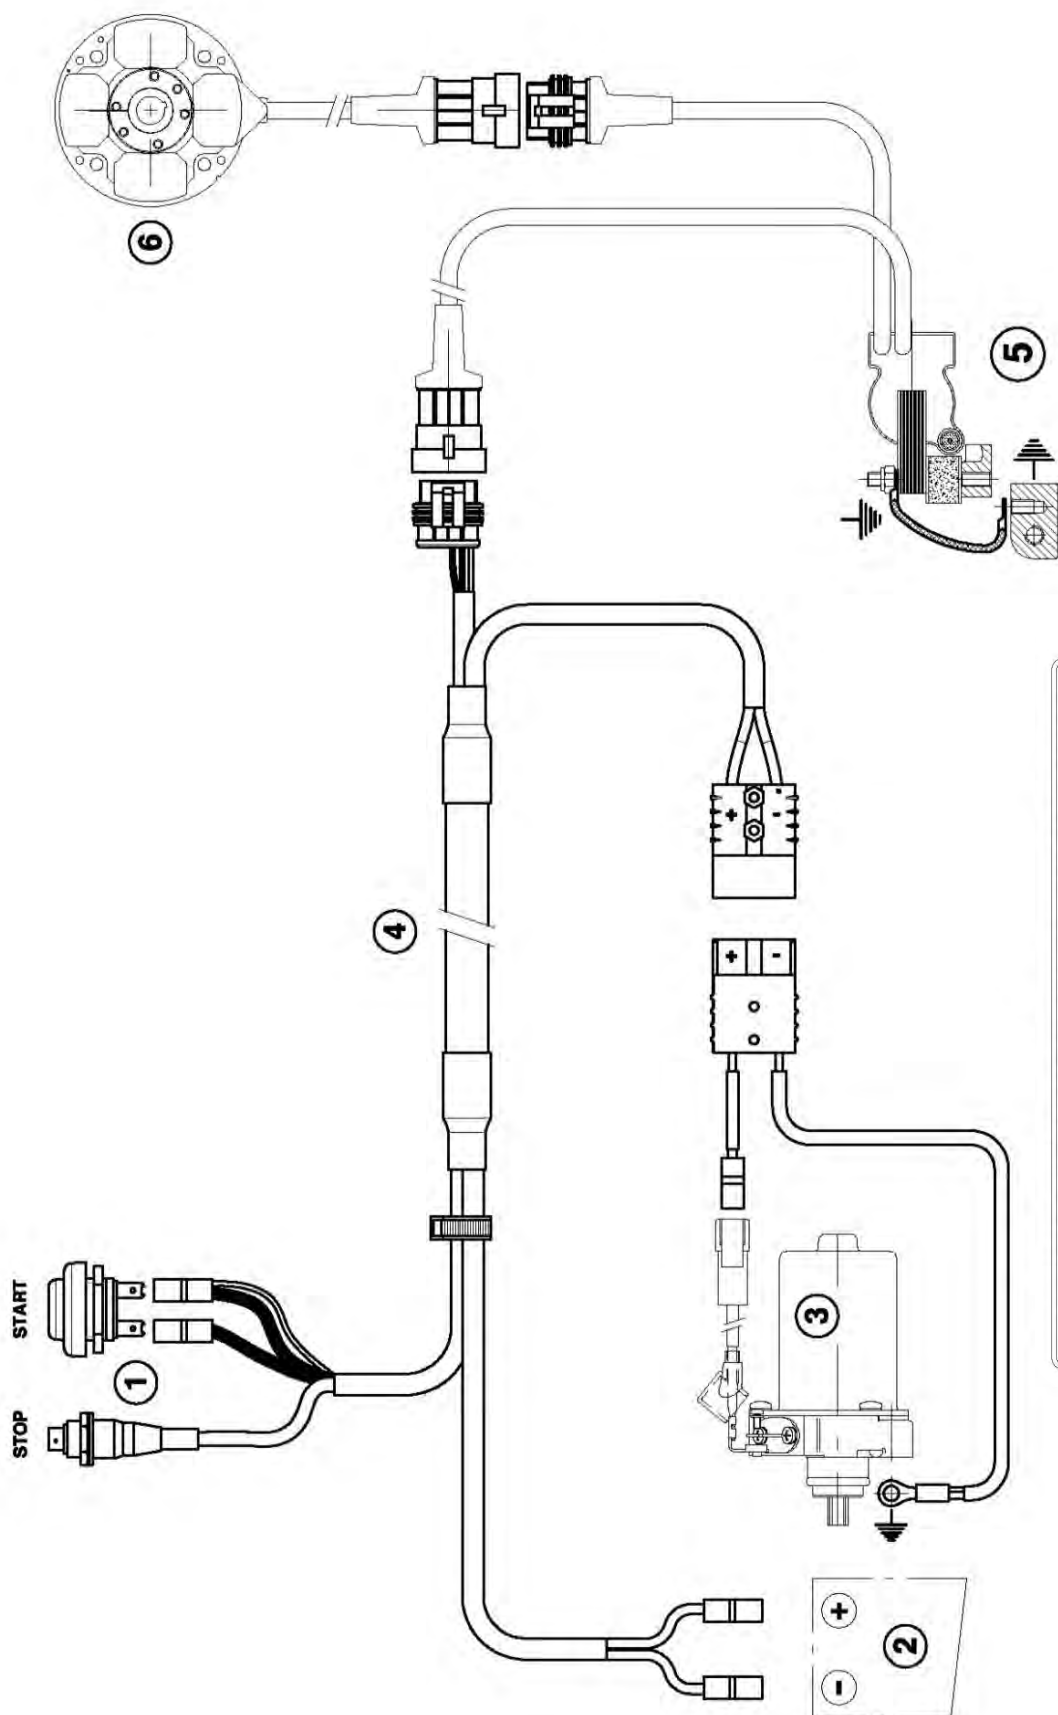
PHOTO COMPLETE ALTERNATIVE WIRING LOOM
